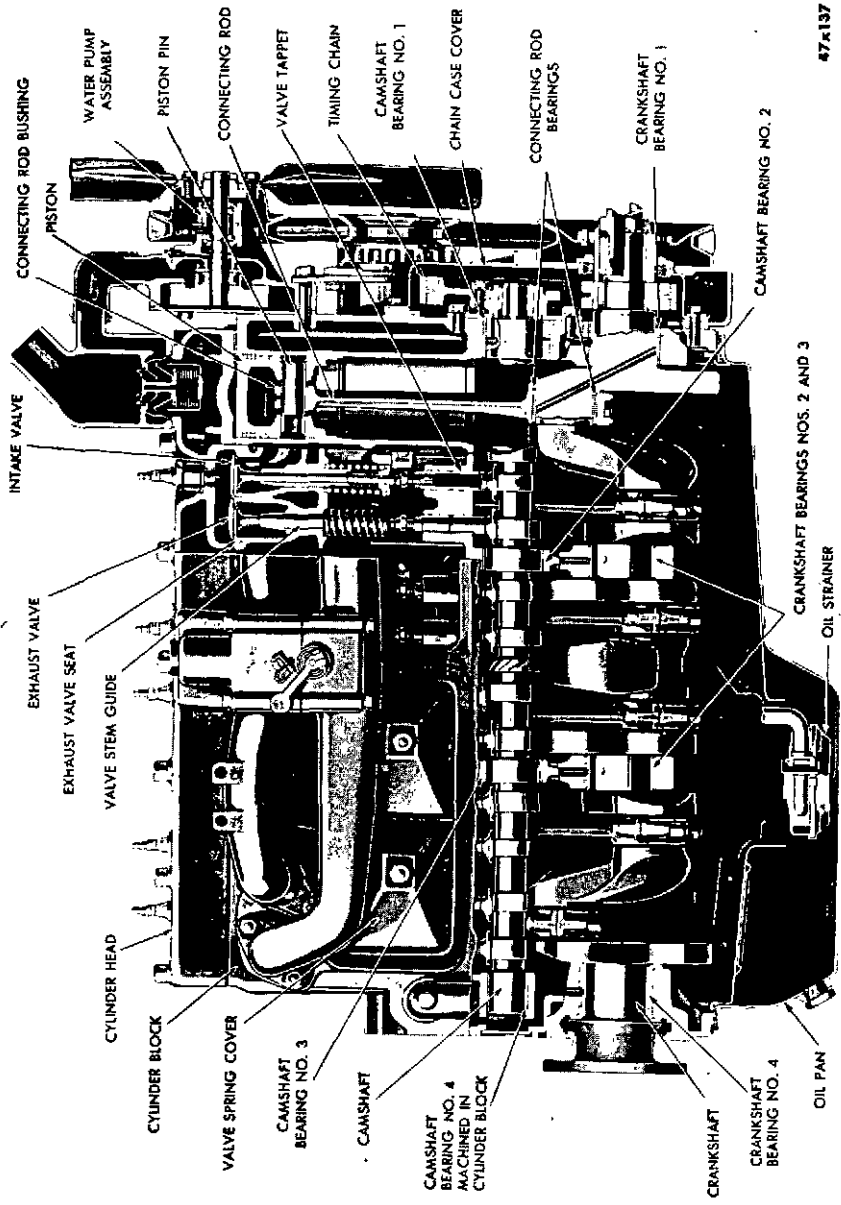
Chrysler 6-Cylinder Industrial Engine (Sectional View)
